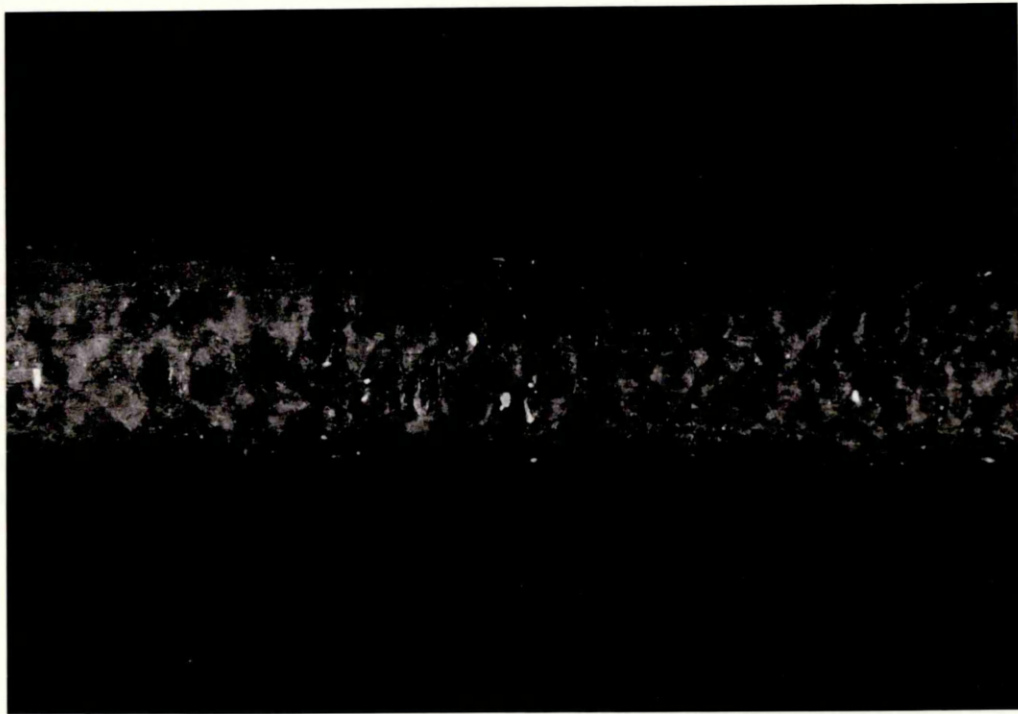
SHARKSKIN ON MILD STEEL WIRE COATING
